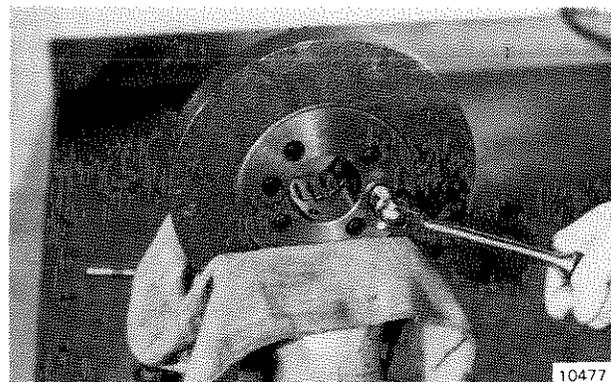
ASSEMBLY OF THE BRAKE (Page 4 of 4)
